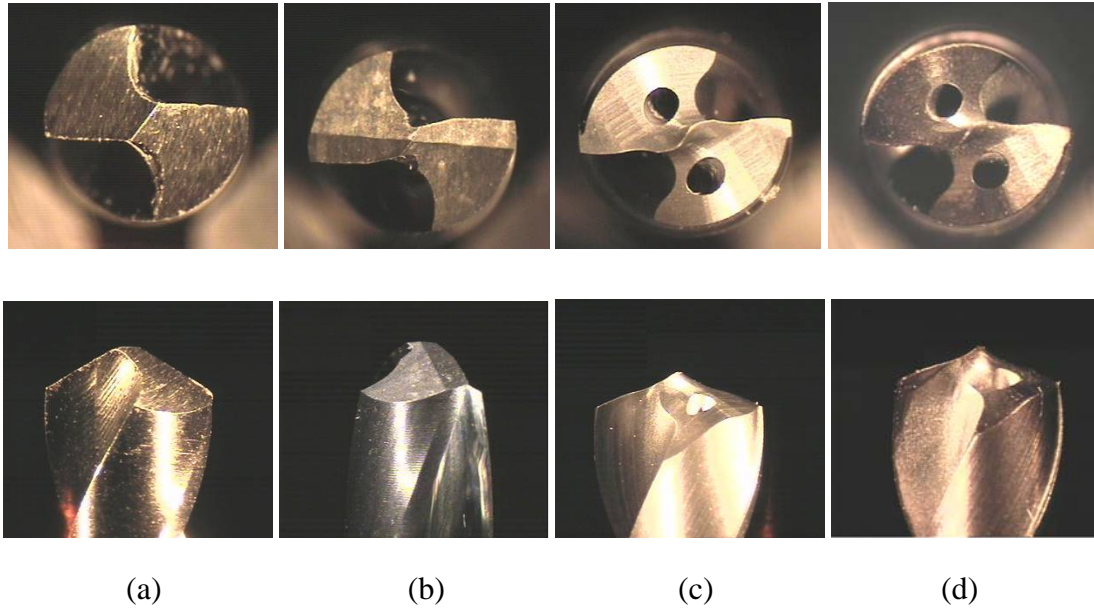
Top and side view of three types of drill: (a) HSS Twist, (b) WC-Co Twist, (c) WC-Co Spiral, and (d) WC-Co Spiral+Coating.
